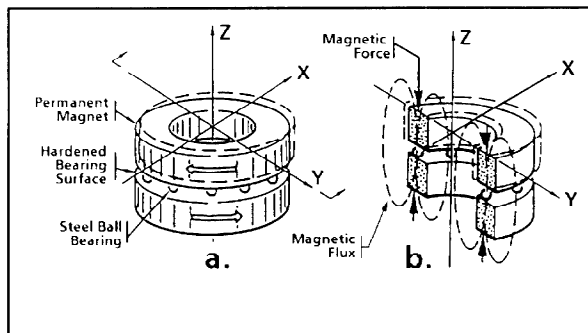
Magnetic Ball Bearing Concept Design. This geometry allows translation in both the X and Y directions and rotation about the Z axis [9]
